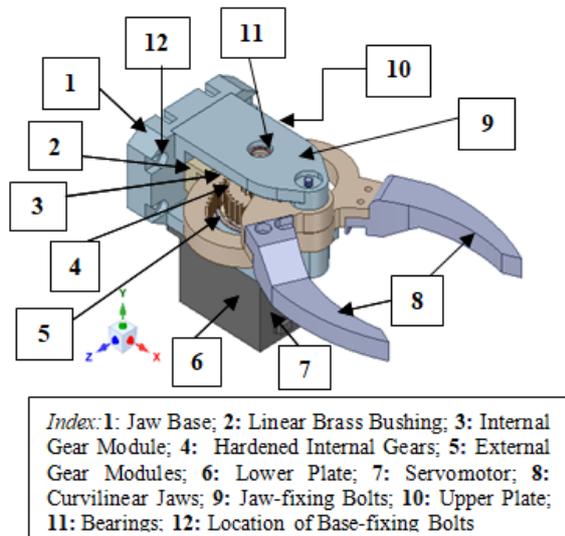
3D Isometric View of the Prototype Curvilinear-Jaw Robotic Gripper
